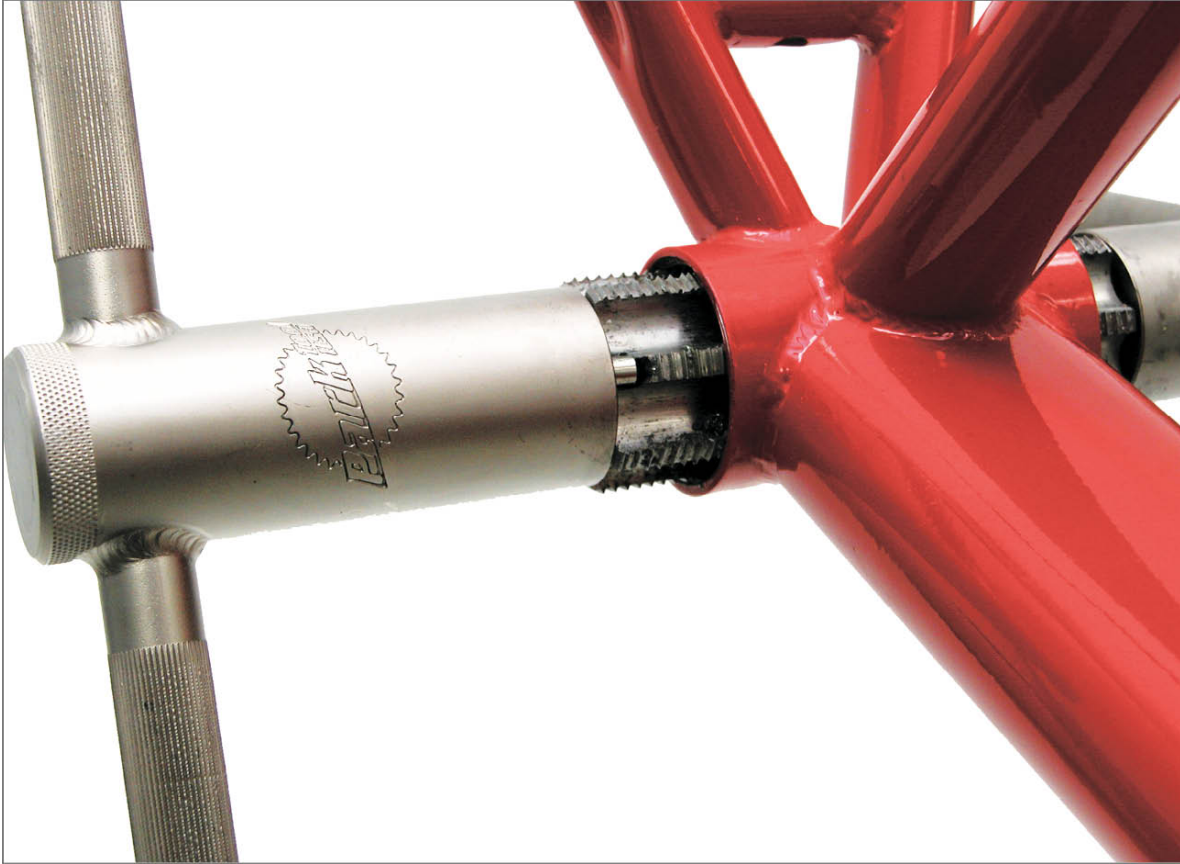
Tapping a threaded bottom bracket shell to correct threading issues
